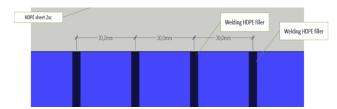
Welding pattern in HDPE sheet Elimination
